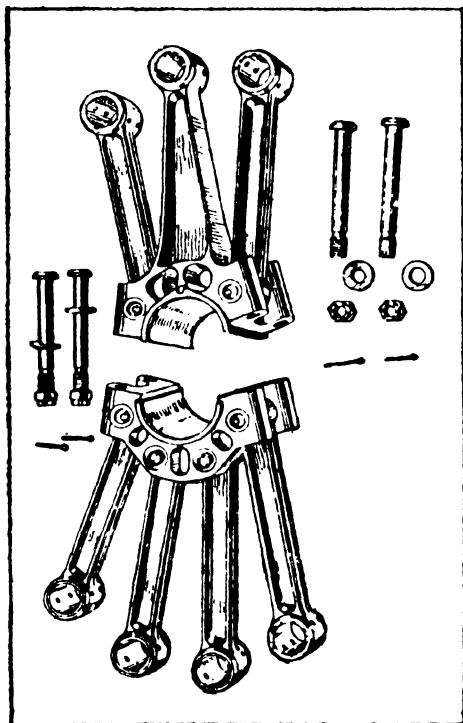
By courtesy of Armstrong Siddaley Motors Ltd.
